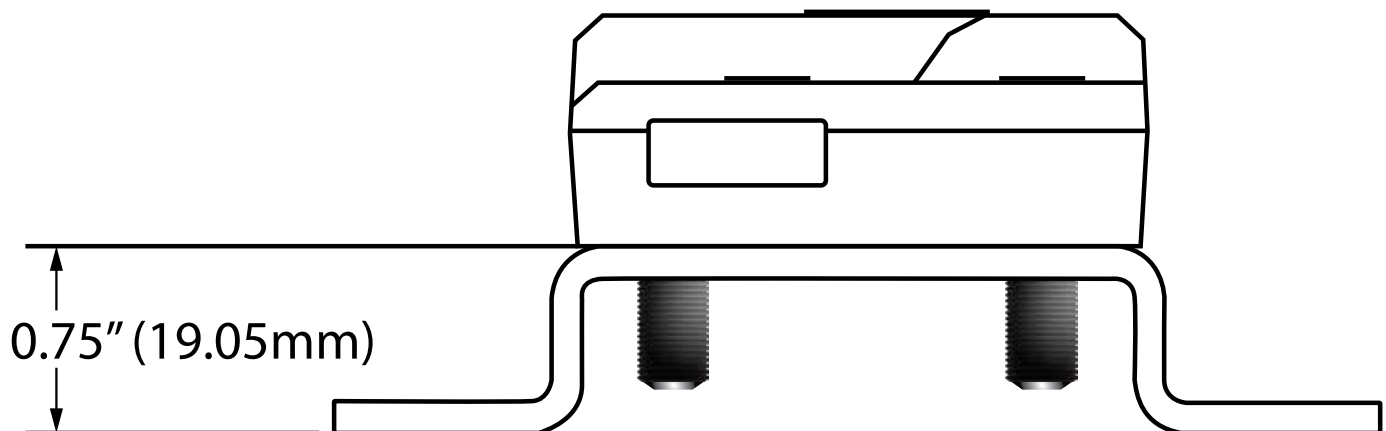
IRIM Bracket Bolt Pattern Dimensioned Front View
